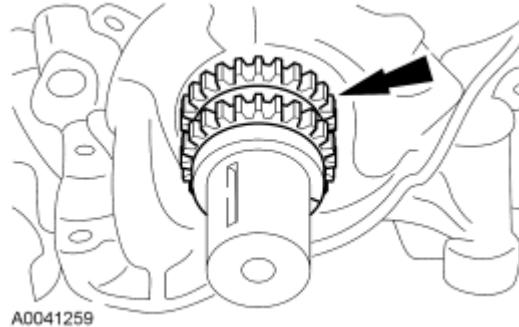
Locating Crankshaft Sprockets With Timing Marks Out
